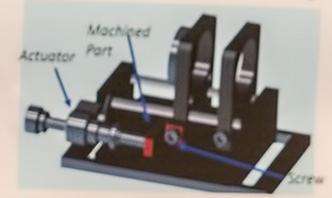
A machined part is attached to the lens and held together by a screw. This machined part is mounted to the actuator which moves the lens accordingly. This simple design accomplishes most of the design goals.
